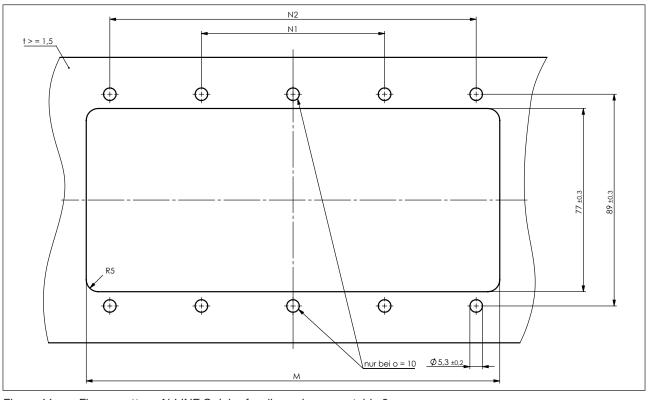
Flange pattern AirLINE Quick - for dimensions, see table 2
